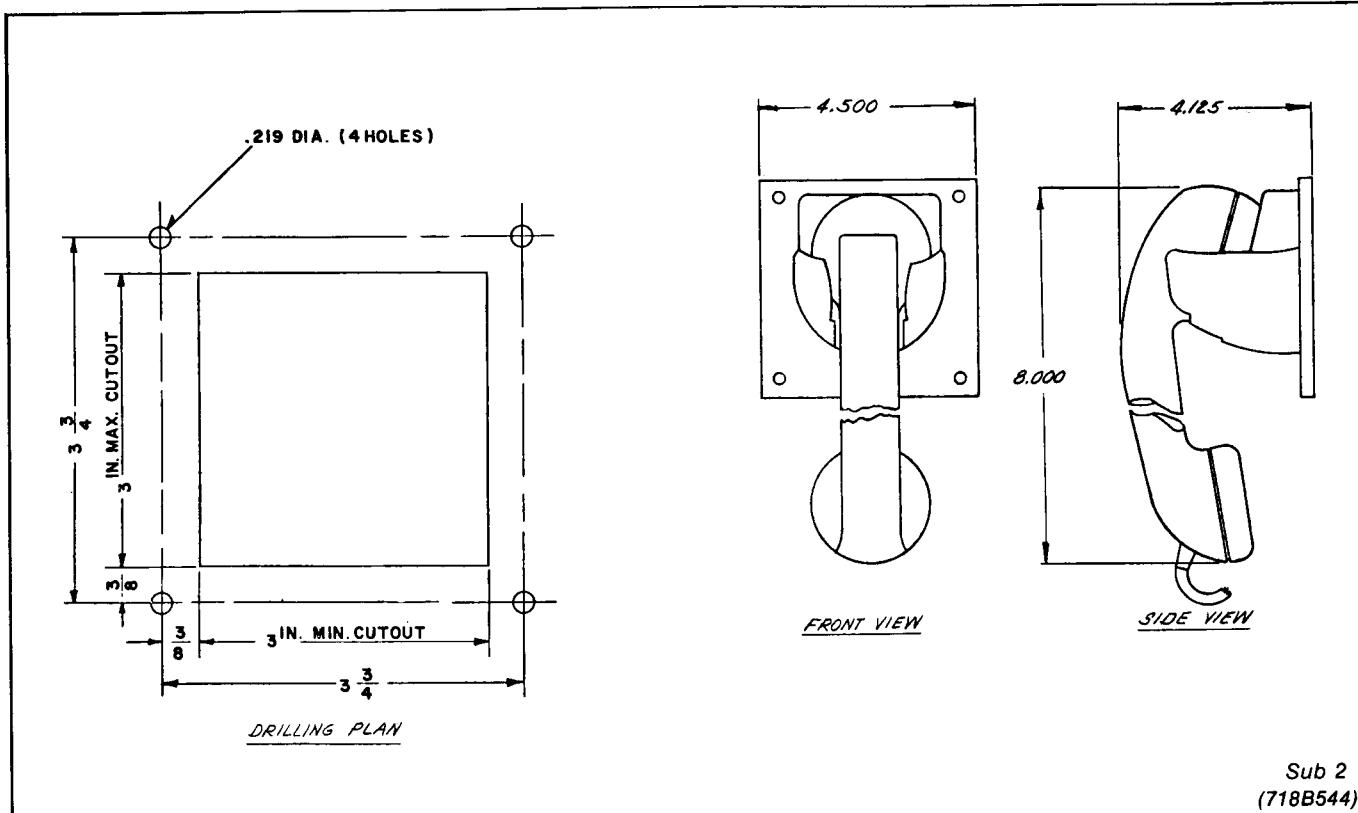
Remote Hookswitch Assembly for Panel Mounting.
